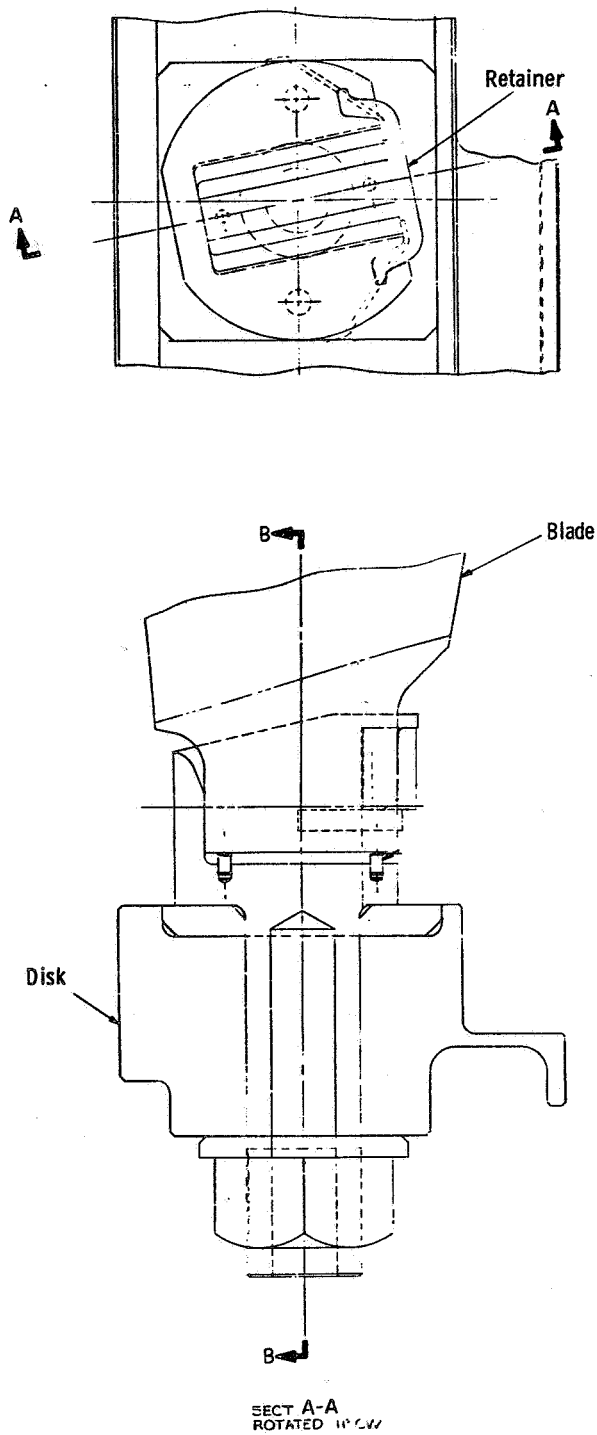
Whirligig Rotor Assembly, QCSEE Impact Tests.
